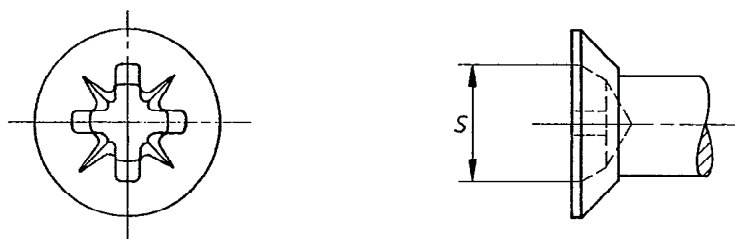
Recessed truncated countersunk head machine screws: enlarged views of recess type Z
